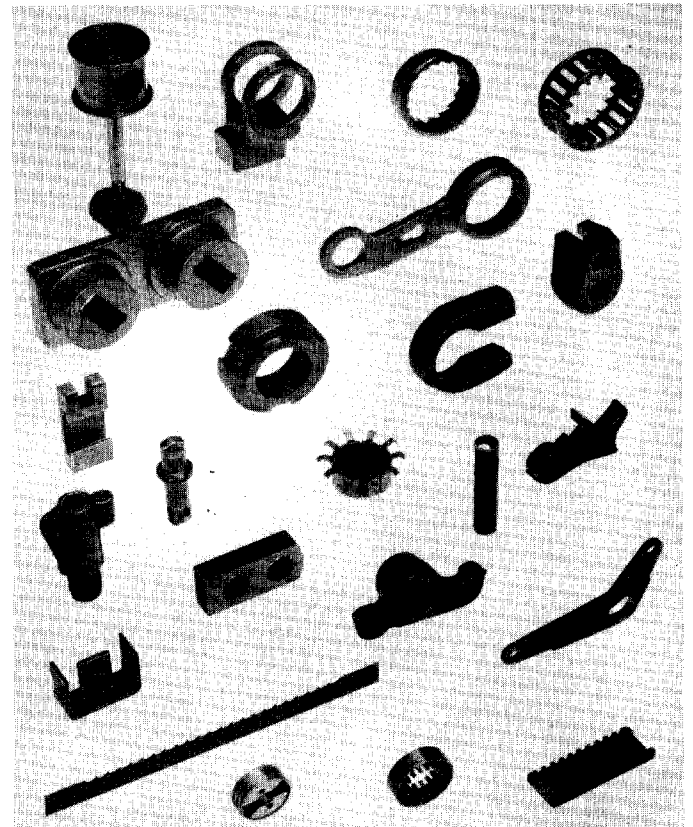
These are some typical parts machined by broaching. (LaPoint Machine Tool Co.)
